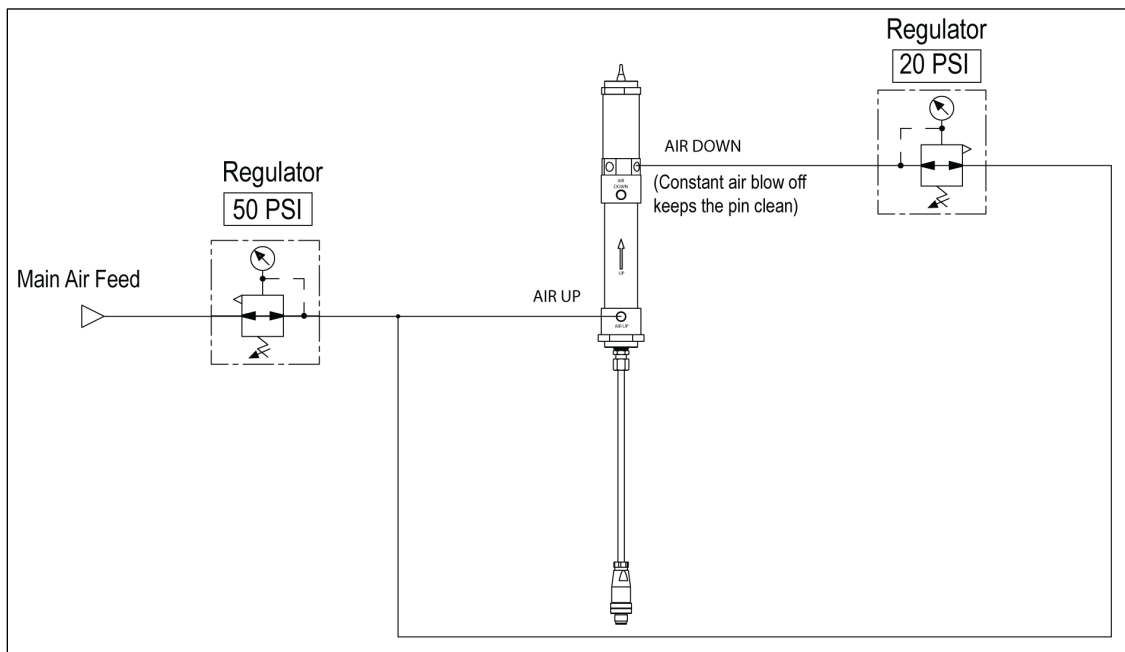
Pneumatic Connection Diagram for VeriFast™ IA Clamp Mount Weld Body (Only) with Non-Retractable Pin
